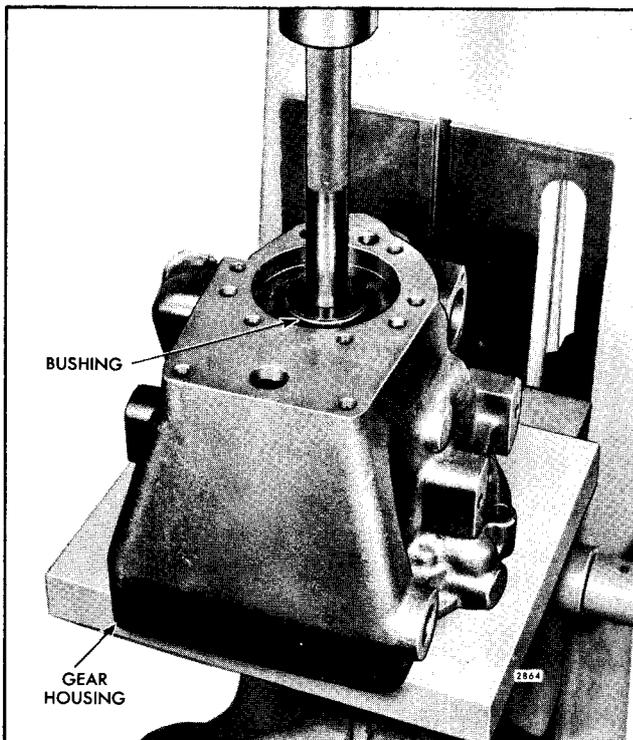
Installing Drive Shaft Bushings in Reverse Gear Housing
